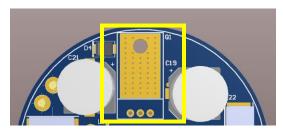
Q1 on Bottom Layer 24VDC Driver Board
